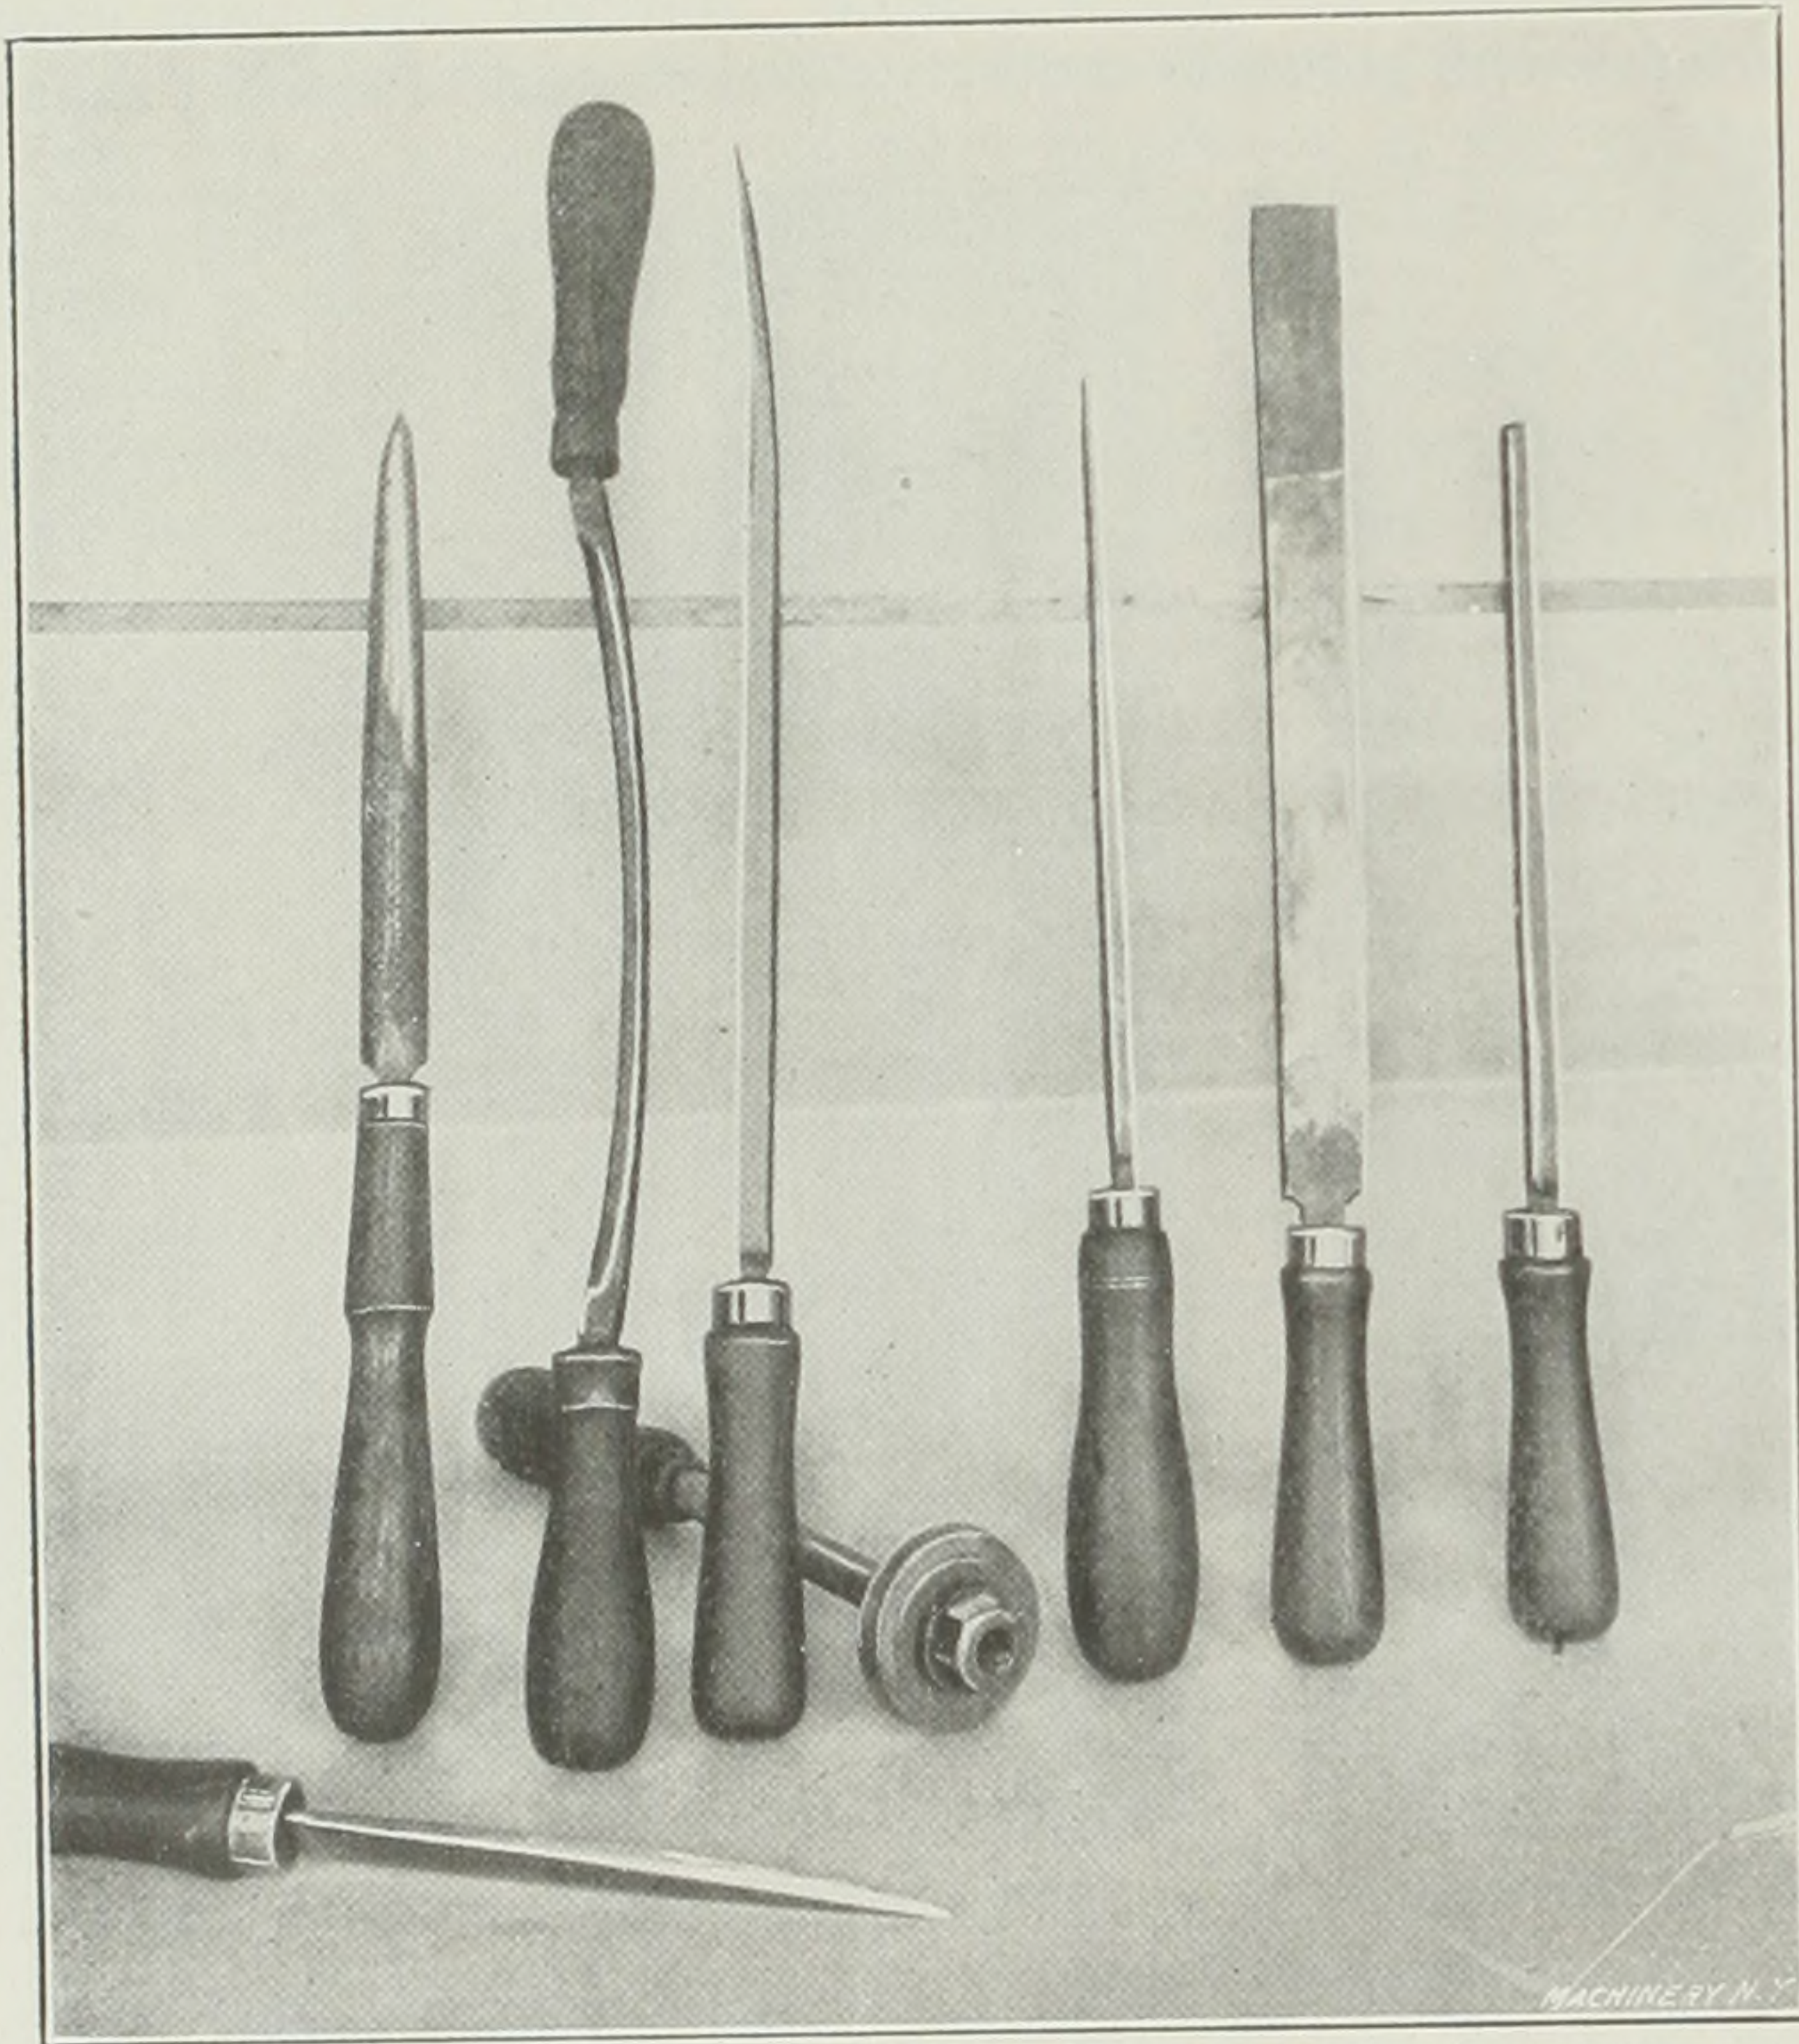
Collection of Hand Scrapers for Flat Surfaces and for Journal Bearings
